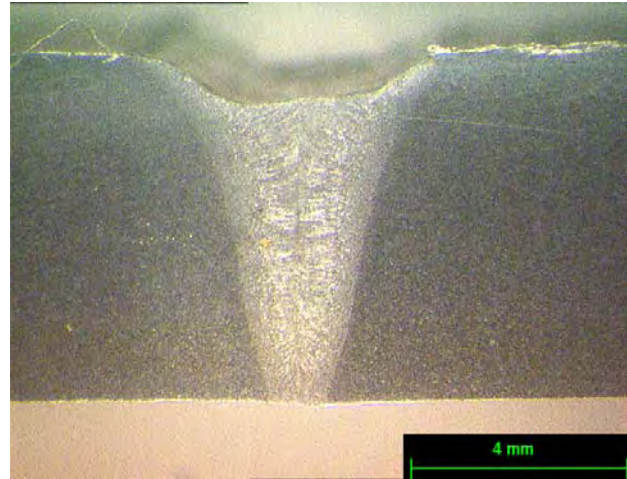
Hybrid laser-arc root run weld in 6 mm plate
